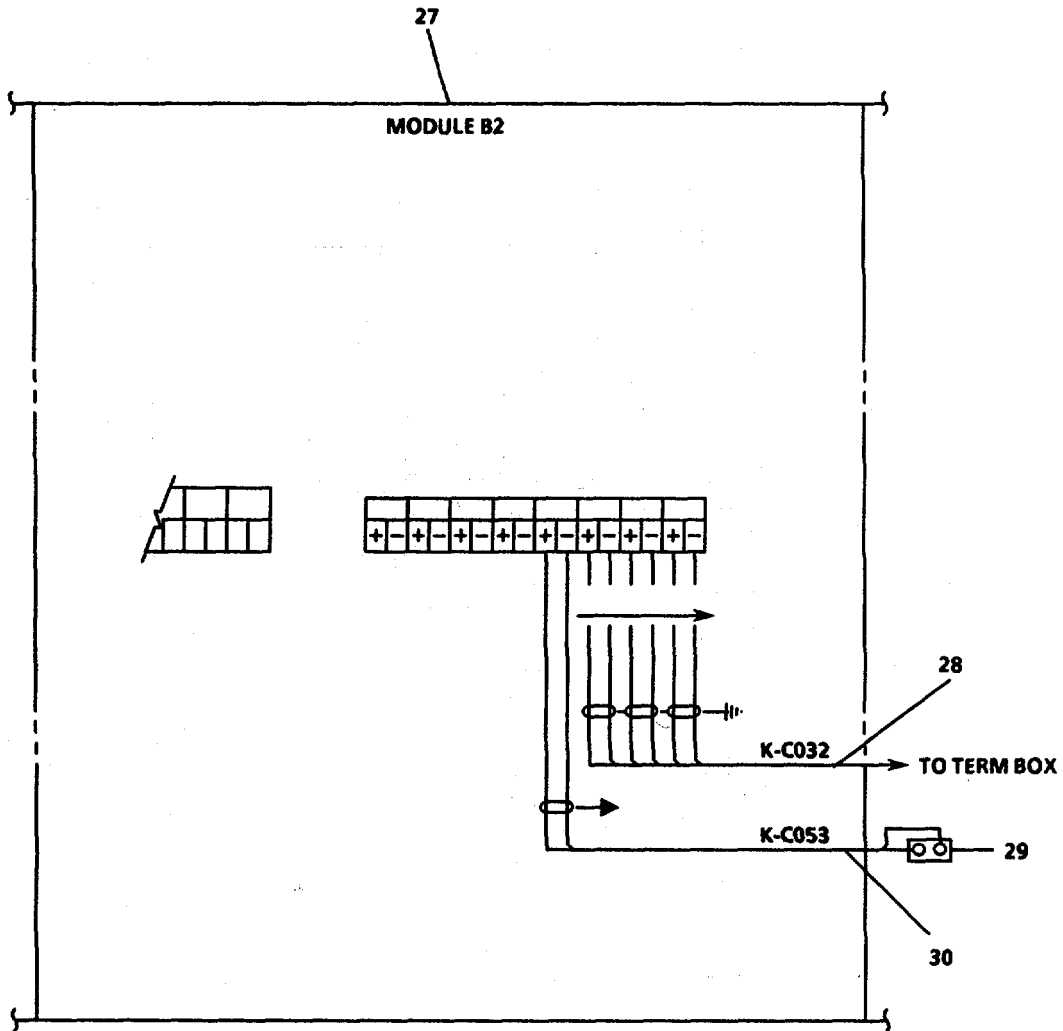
Analog Remote Module Assembly. Repair (Sheet 4 of 6).
